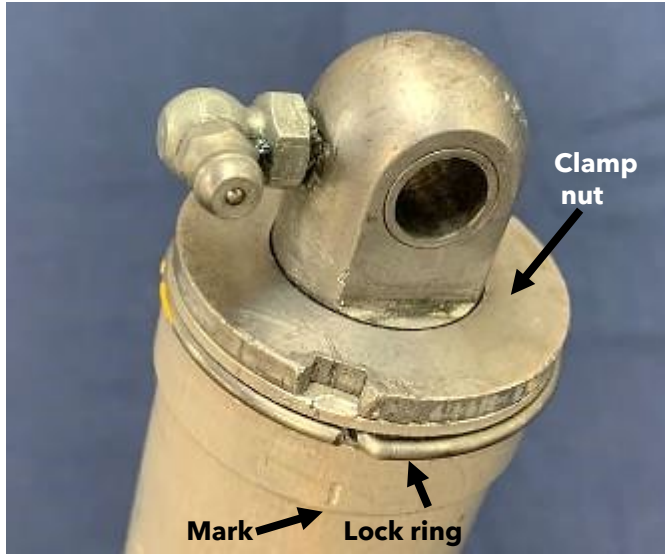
Oblique view of the top eye bolt assembly in the as-received condition showing a lock ring that is in the fully engaged position. Area indicated by "mark" was vibro-peen marked by the NTSB Materials Laboratory to mark the as-received position of the lock ring. Lock ring is bent to the right relative to the tang portion when looking into exterior hole of the barrel.
